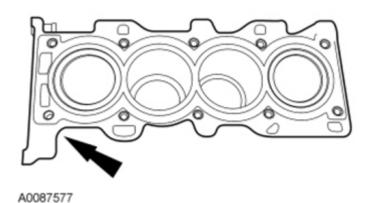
Locating Head Gasket Courtesy of FORD MOTOR CO.
